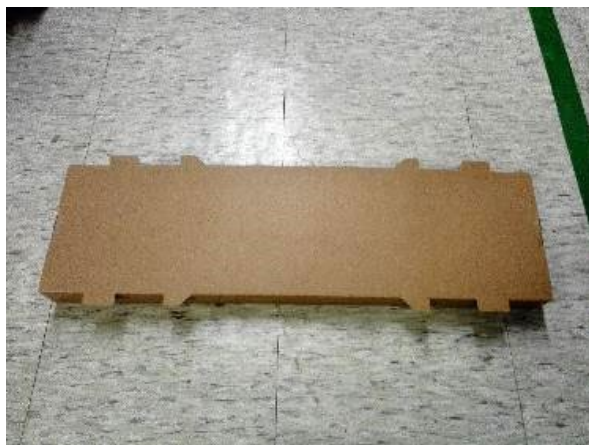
Compute Module Packaging Assembly Instructions – 5, 2
